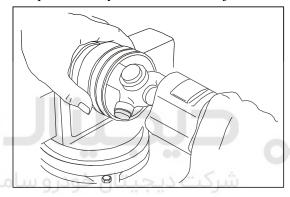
Pull out Drive Shaft and Tripod Assembly
